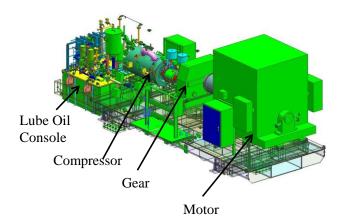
Typical torque box base package design with motor, gear, compressor and lube oil console.
